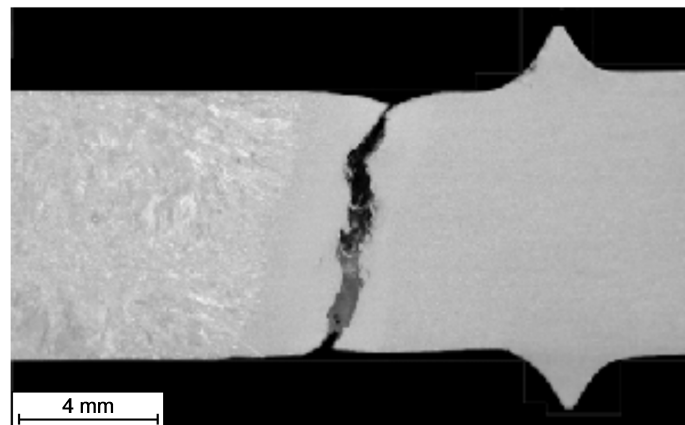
Type IV cracking in a creep-exposed cross-welded E911-sample welded with matching filler, tested at 600°C and 110MPa for 18.000 h [4]
